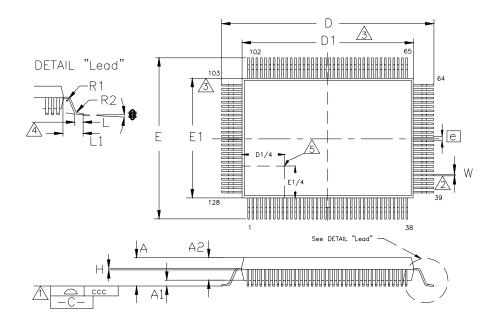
128 Pin QFP Package Outline, 14x20x2.7 Body, 3.2MM Footprint
